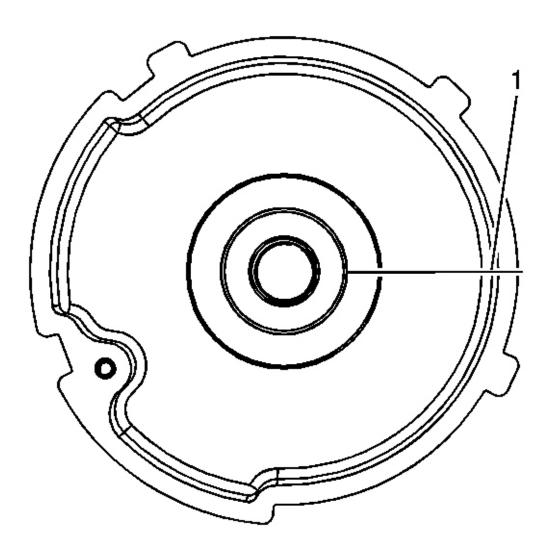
Scribing Or Drawing a Line Courtesy of GENERAL MOTORS CORP.
